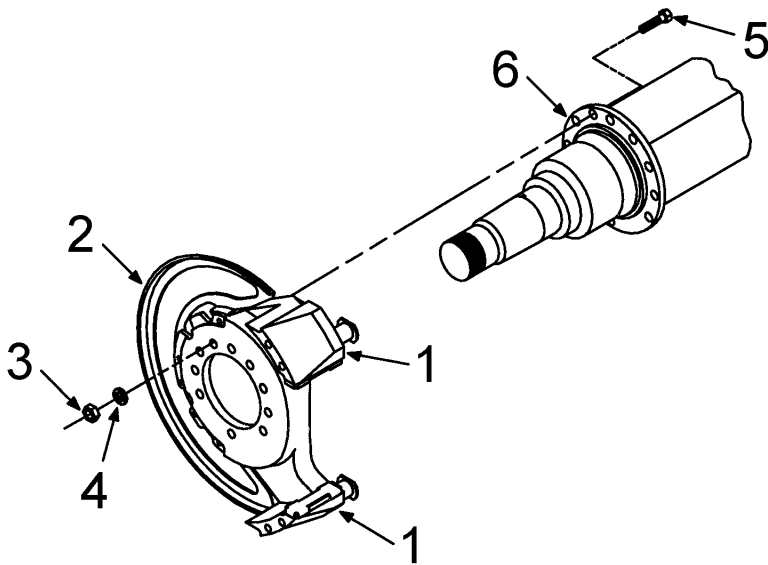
Install Anchor Plate and Splash Shield Assembly on Rear Axle
